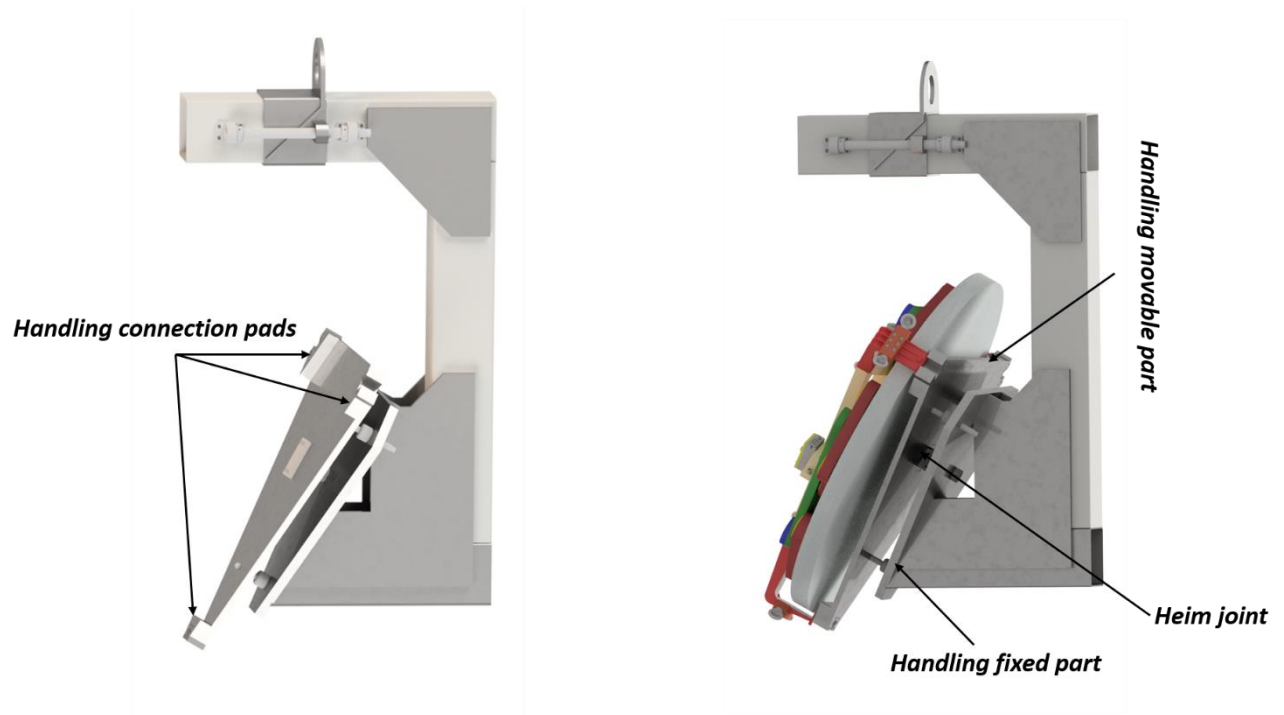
C-shaped handling for M8 installation. The interface between M8 and the handling is between the 3 branches embracing M8 and the 3 connection pads of the handling. The handling is equipped with a hook hoisting connection point having the possibility to slide, in order to have it aligned with the barycentre of the system both when M8 is connected and disconnected.
